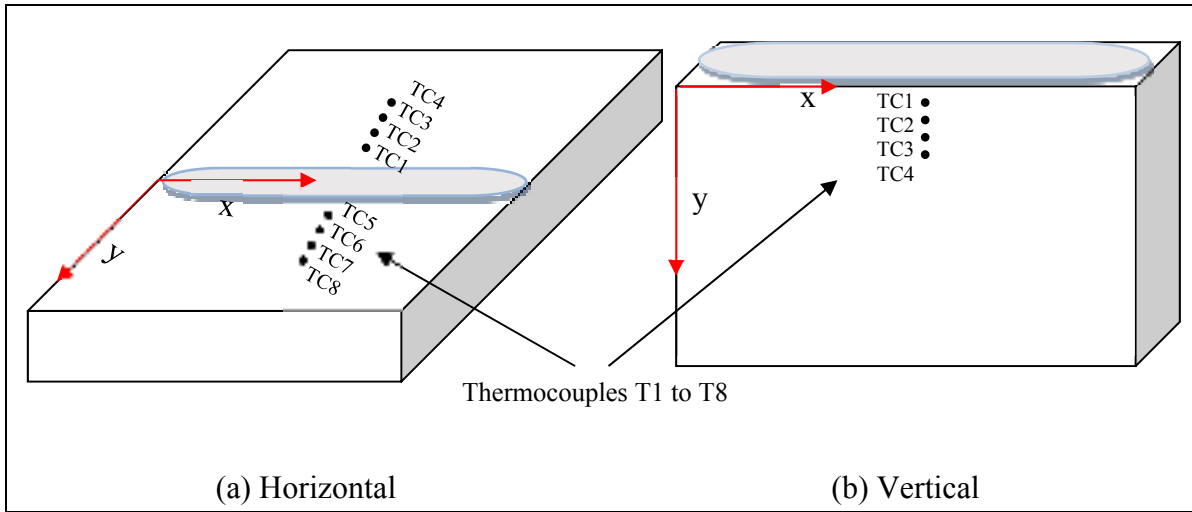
a) Horizontal welding configuration; b) Vertical welding configuration
